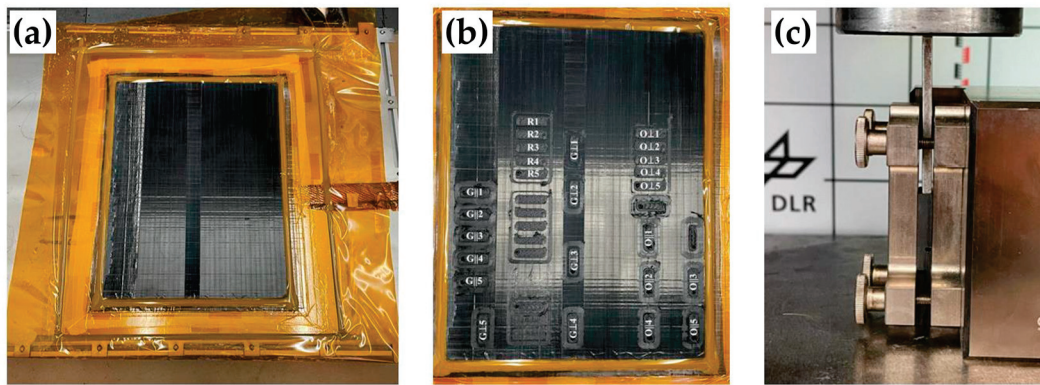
Print and test setup for single-lap shear specimens: (a) laminate before printing, mounted on the print bed; (b) printed specimens on laminate; (c) compression test for shear specimen.
